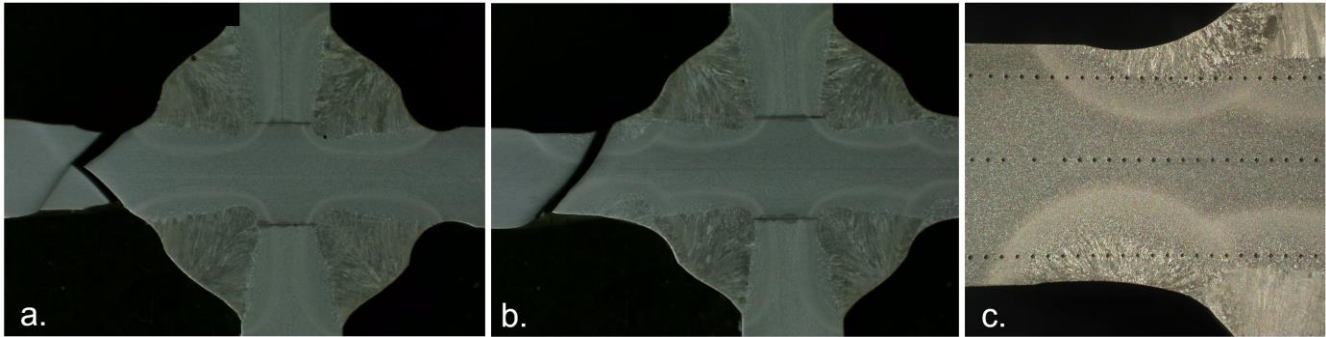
Failures occurred at weld toe in a) burr grinded and b) TIG dressed joints. c) Net section reduction in a TIG dressed joint.
